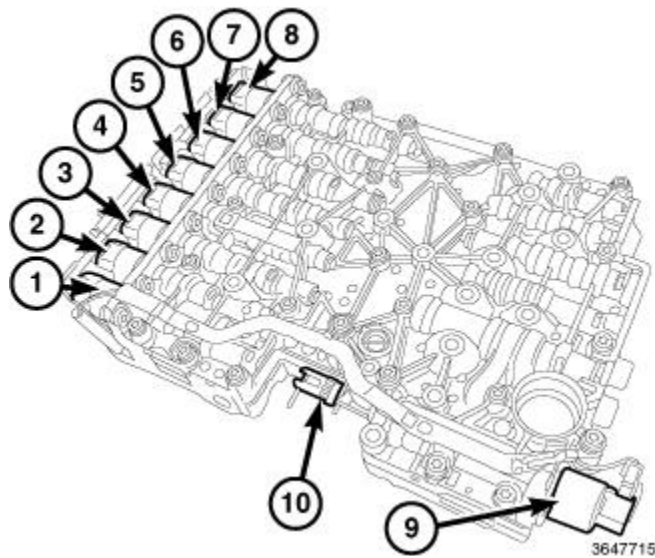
Solenoid A D E C & Park Release Mechanical Valve
